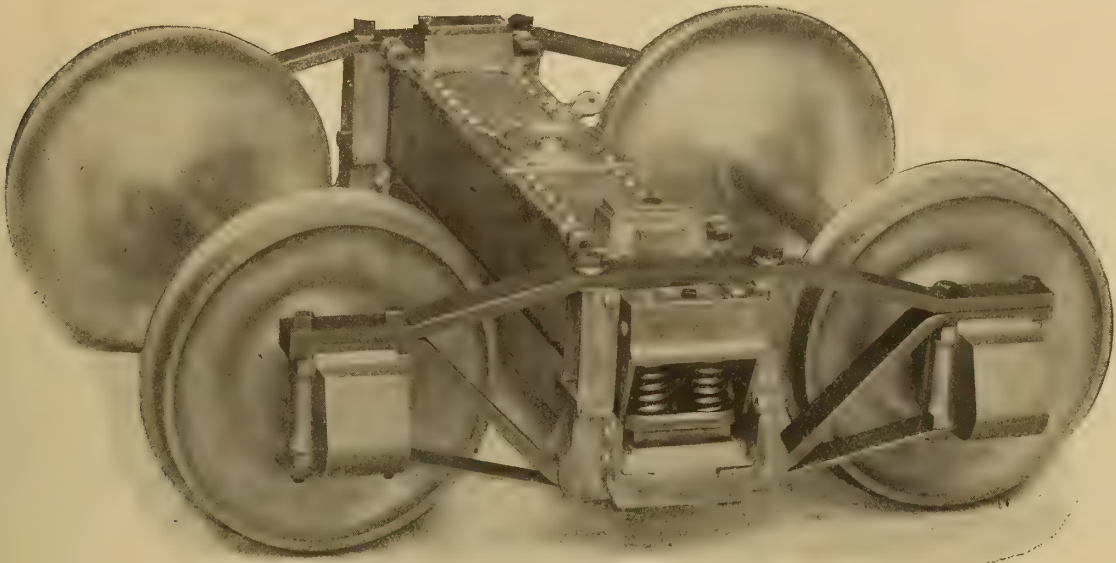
DIAMOND ARCH BAR TRUCK WITH BARBER ROLLER SIDE BEARINGS.
